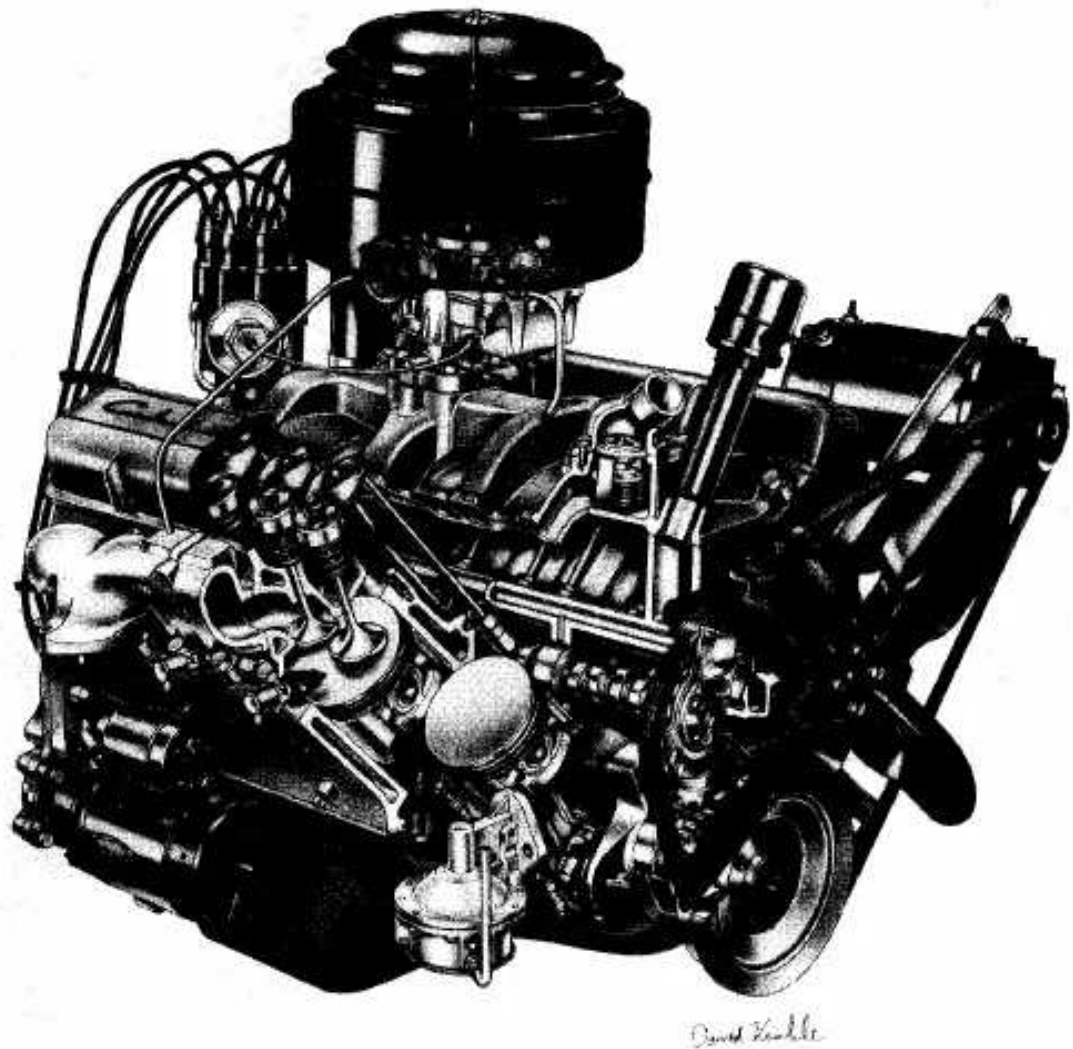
1955 Chevrolet "small block" V8 engine with 265 in.³ (4.34 L) displacement. The four-stroke cycle, spark ignition engine was equipped with a carburetor and overhead valves. Copyright General Motors Corp., used with permission.
